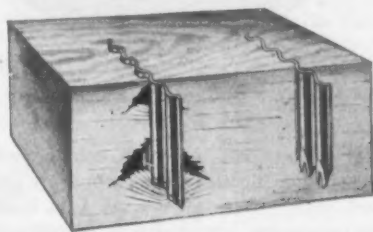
Comparative View of Plain and Saw Tooth Fasteners Entering Wood.
